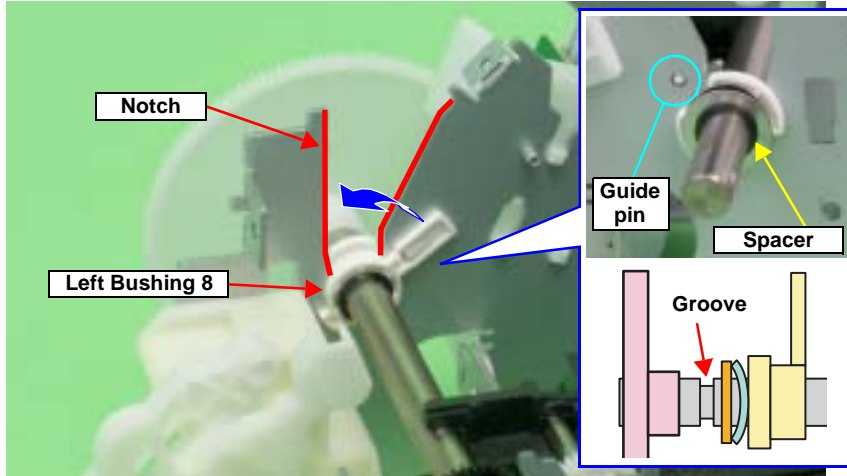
Removing the Spacer and Rotating the Left Bushing 8
